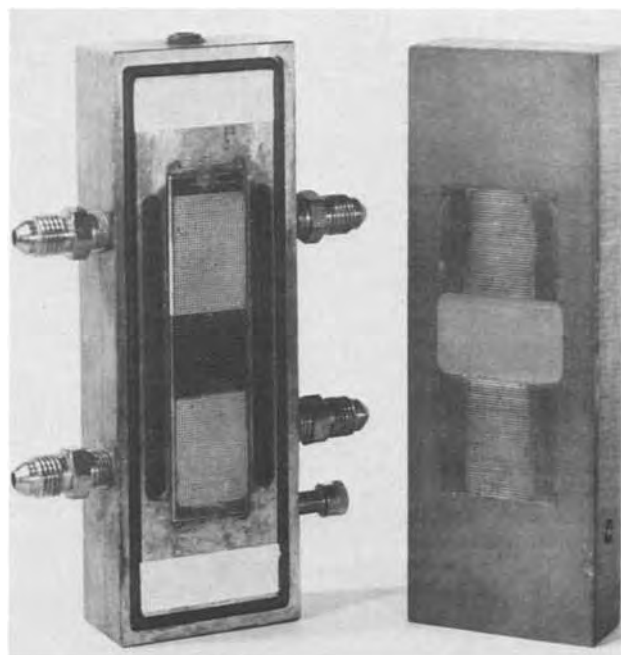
The fixture for pattern ECM with anode holder and anode sample panel at left and machined cathode at right.
